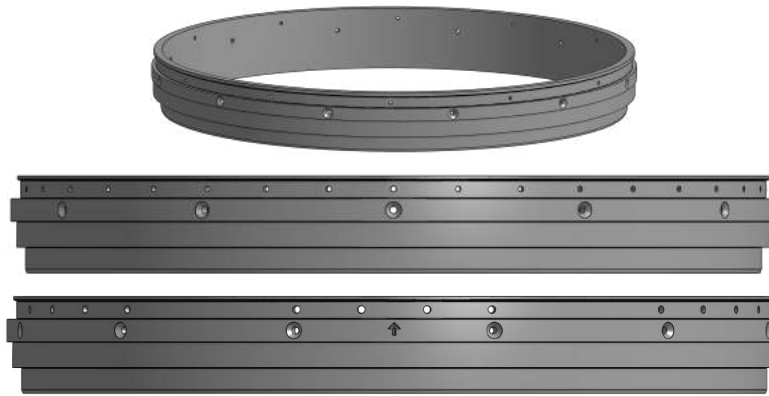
TOP: V1 coupling ring with arc clamp holes on top and bulkhead holes in the middle to allow for attachment of bulkheads. MIDDLE: V2 coupling ring with additional fastener holes added. BOTTOM: V3 coupling ring with unused fastener holes removed and arrow added for assembly alignment and placement of arc clamps.
